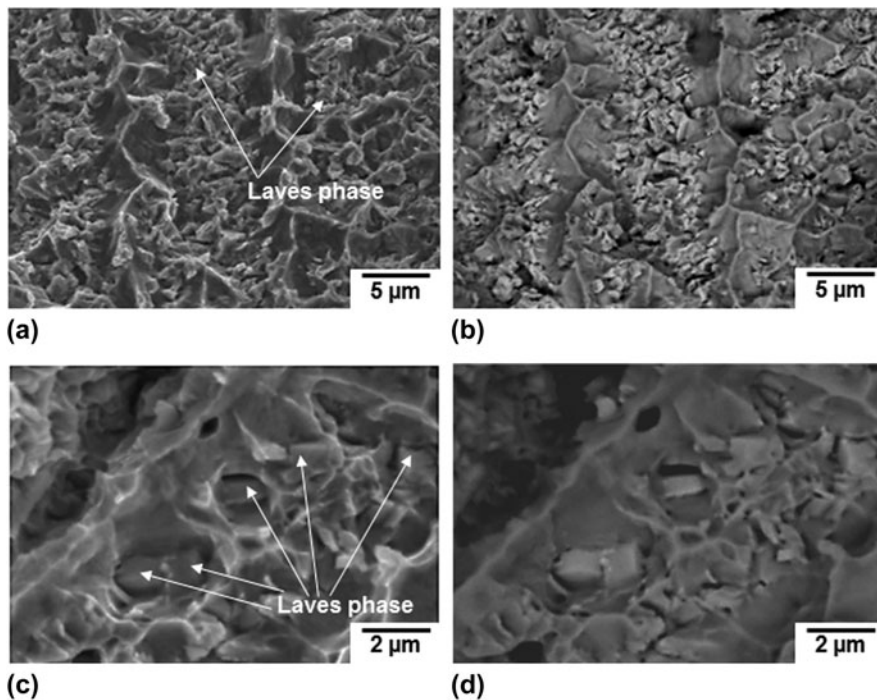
The presence of Laves phase on the tensile fracture surfaces of (a, b) DLD and (c, d) DLD-PM coupons.
